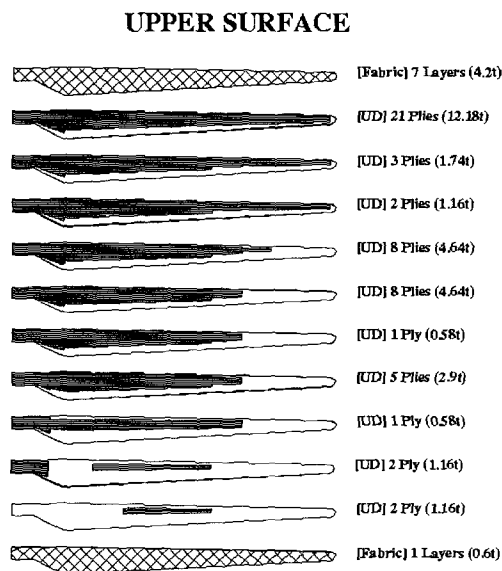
Lay-up sequence for the skin and the spar flange of upper blade part
